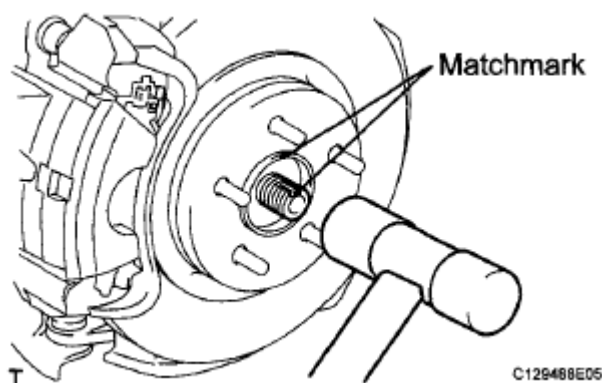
Identifying Matchmarks On Drive Shaft And Axle Hub
